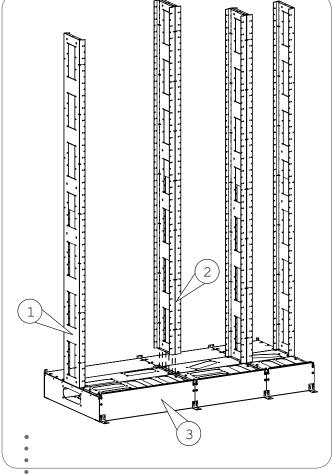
b) Fastening frame plates to the base of a 600 mm deep base structure.
